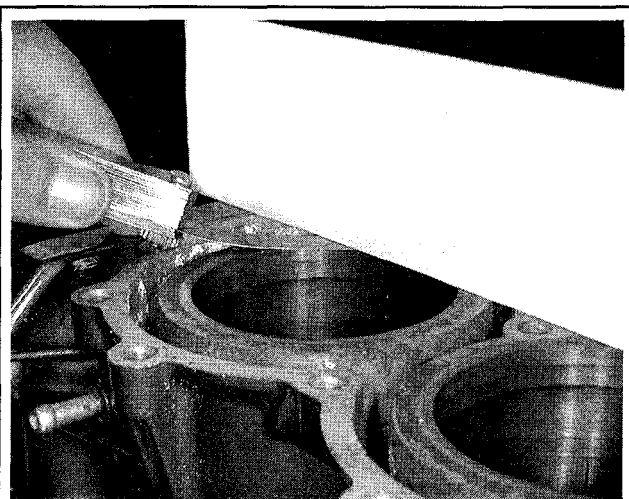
Check the cylinder block along the head gasket mating surfaces for flatness
